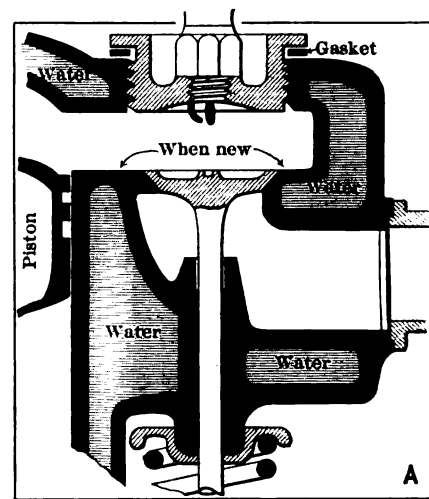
Cross-section of a valve chamber, showing the valve on its seating when the motor is new
